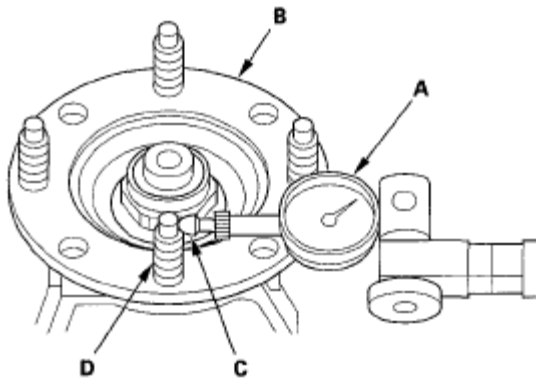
Setting Dial Indicator On Transfer Companion Flange
